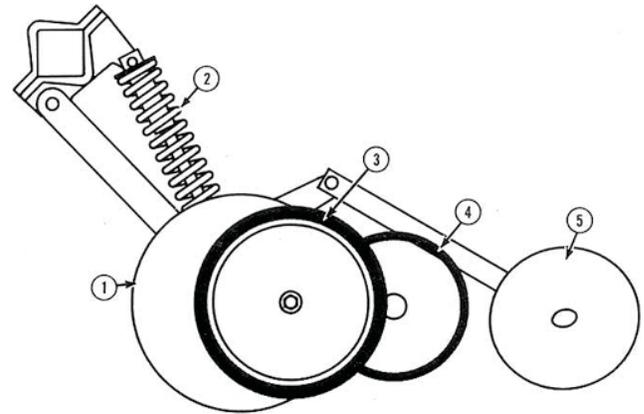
John Deere 752 Opener and Closing System: (1) Disk Blade Opener, (2) Compression Spring, (3) Gauge Wheel, (4) Press Wheel and (5) Closing Wheel.
